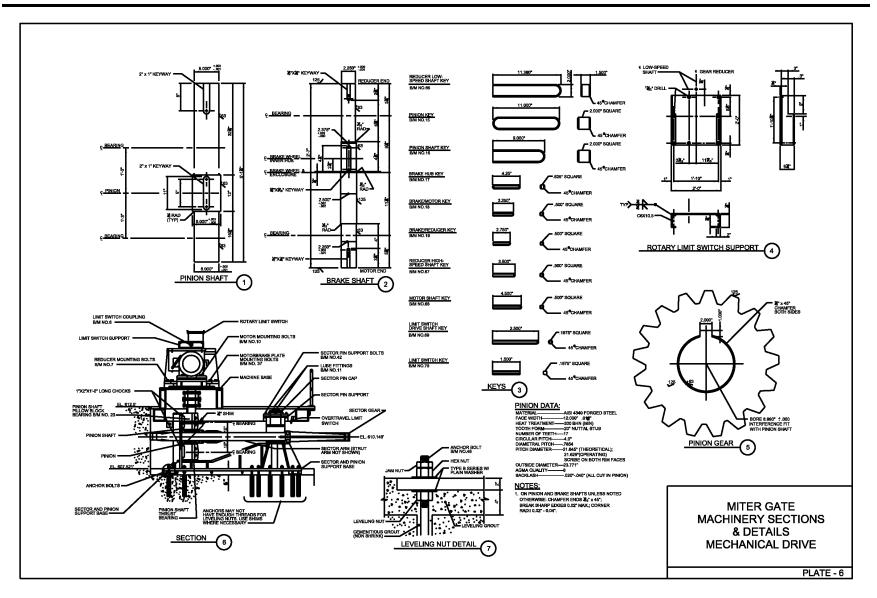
Plate 6: Miter gate machinery sections and details - mechanical drive
